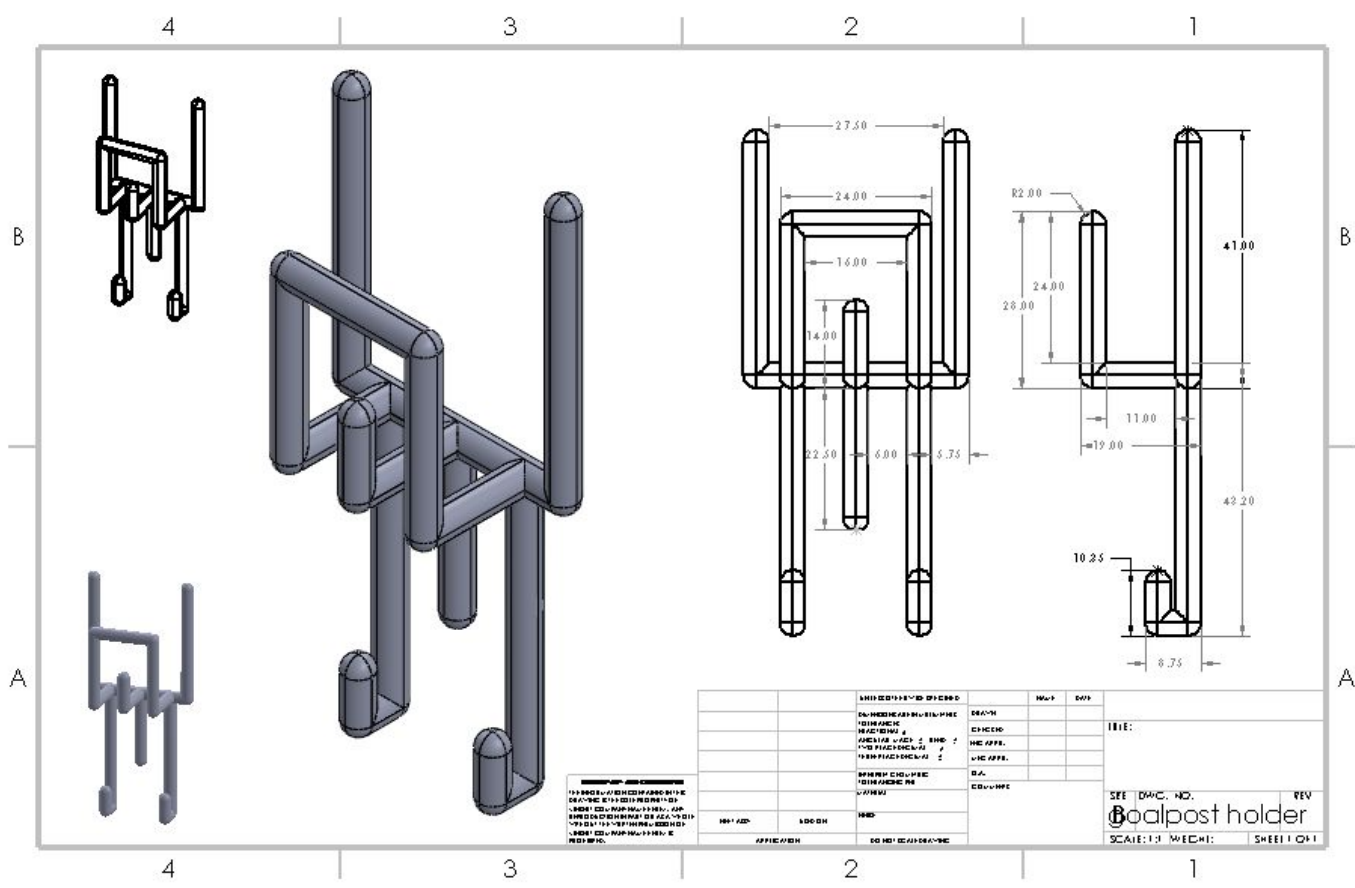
A 3D model drawing prototyping the portion of the “Goalpost” design that connects to the strap and holds the sensor.
